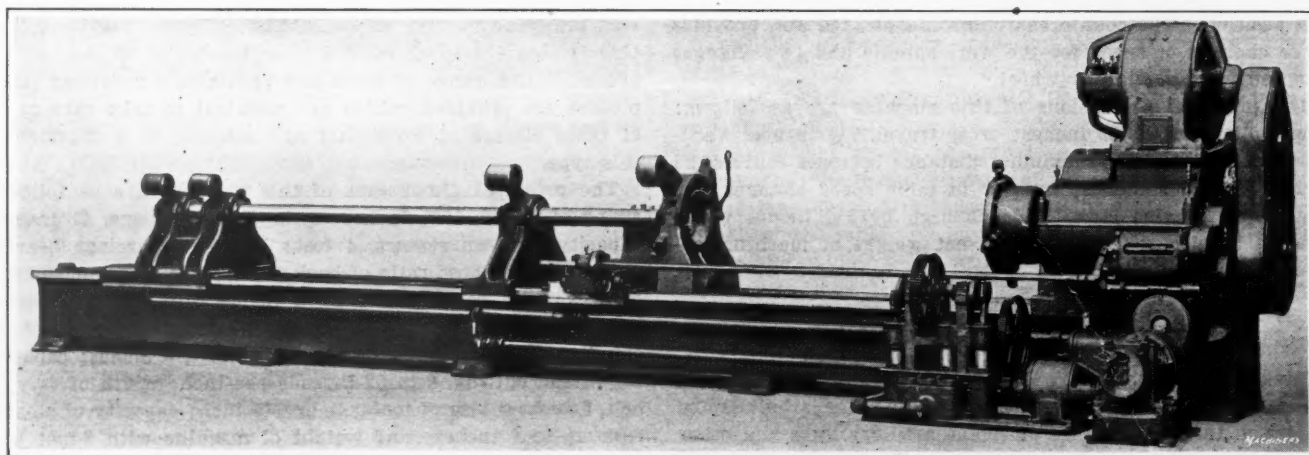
Opposite Side of LeBlond Gun Boring Lathe, showing Pump and Power Traversing Mechanism
